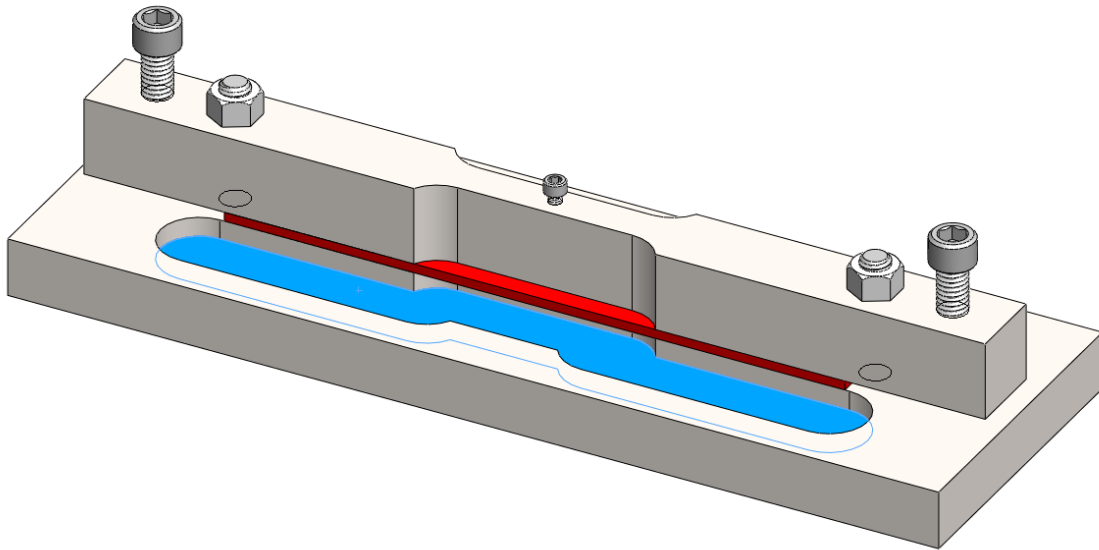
ASTM E8 tensile specimen end-milling fixture.
